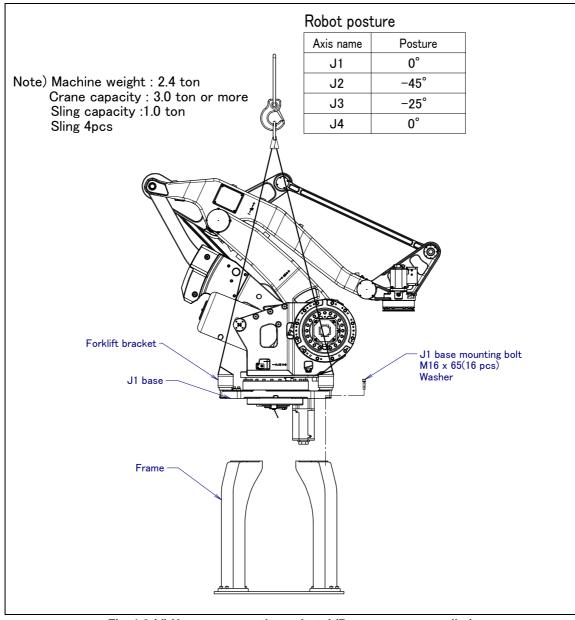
(d) How to remove the pedestal (Remote type controller)
